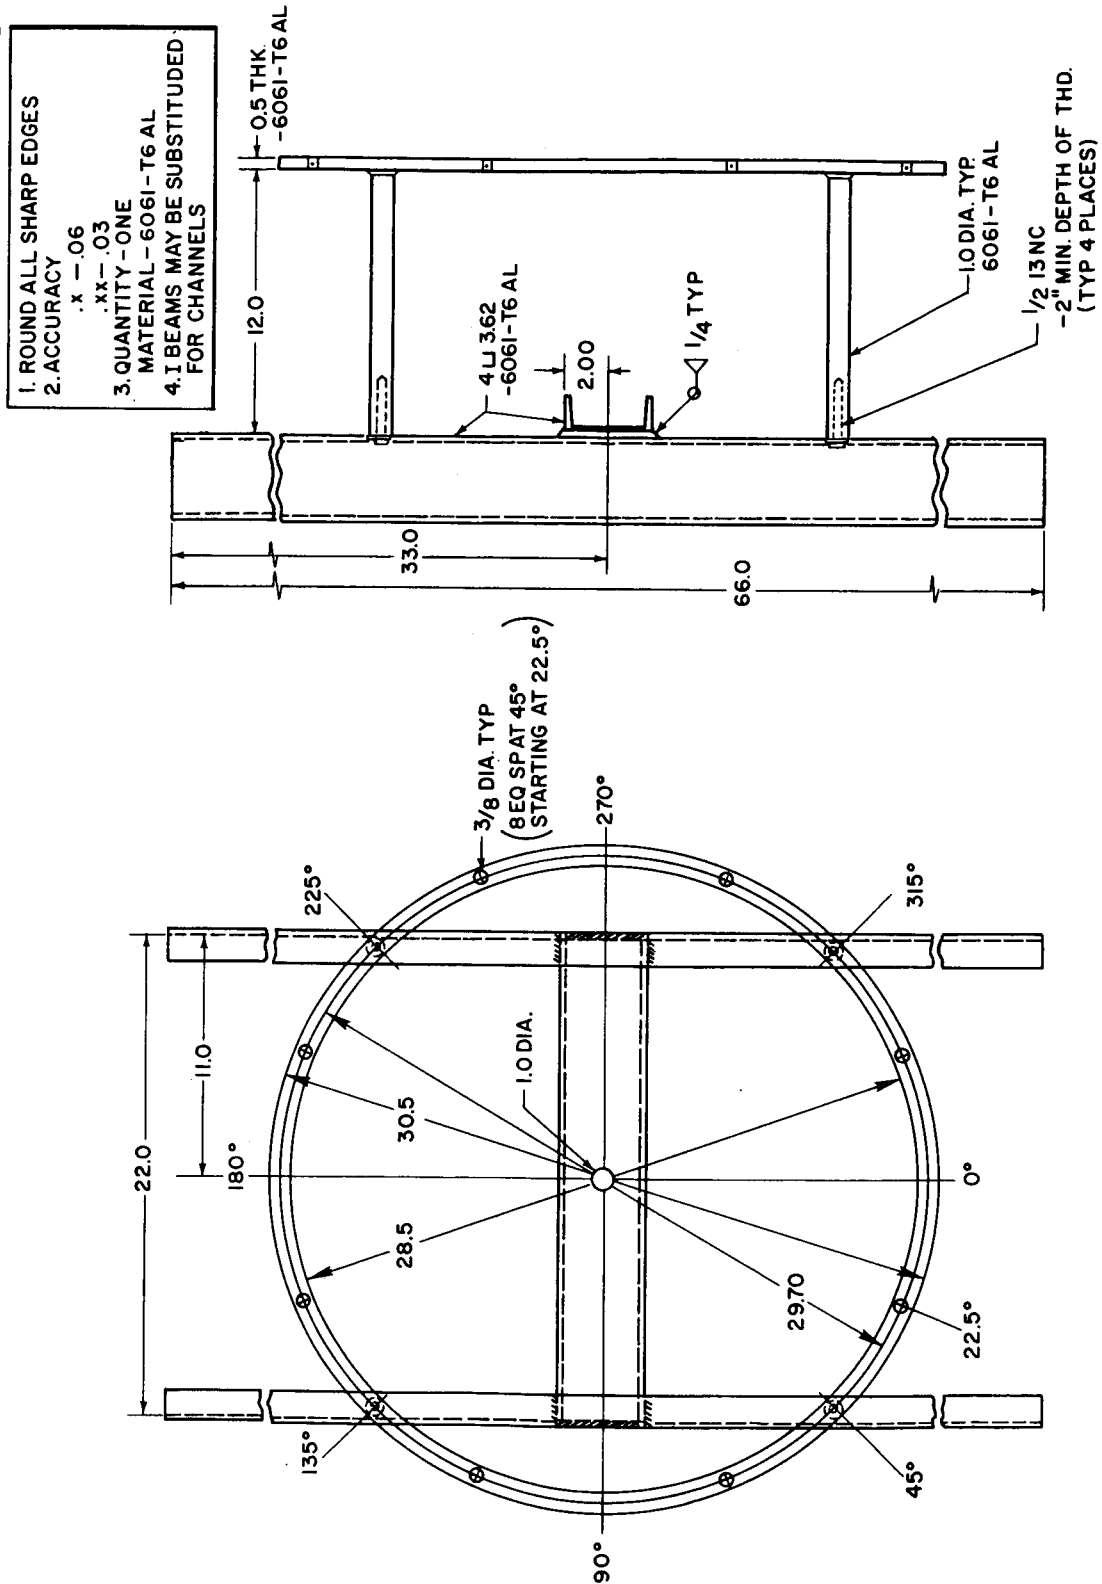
STERILIZATION CONTAINER TEST FIXTURE
